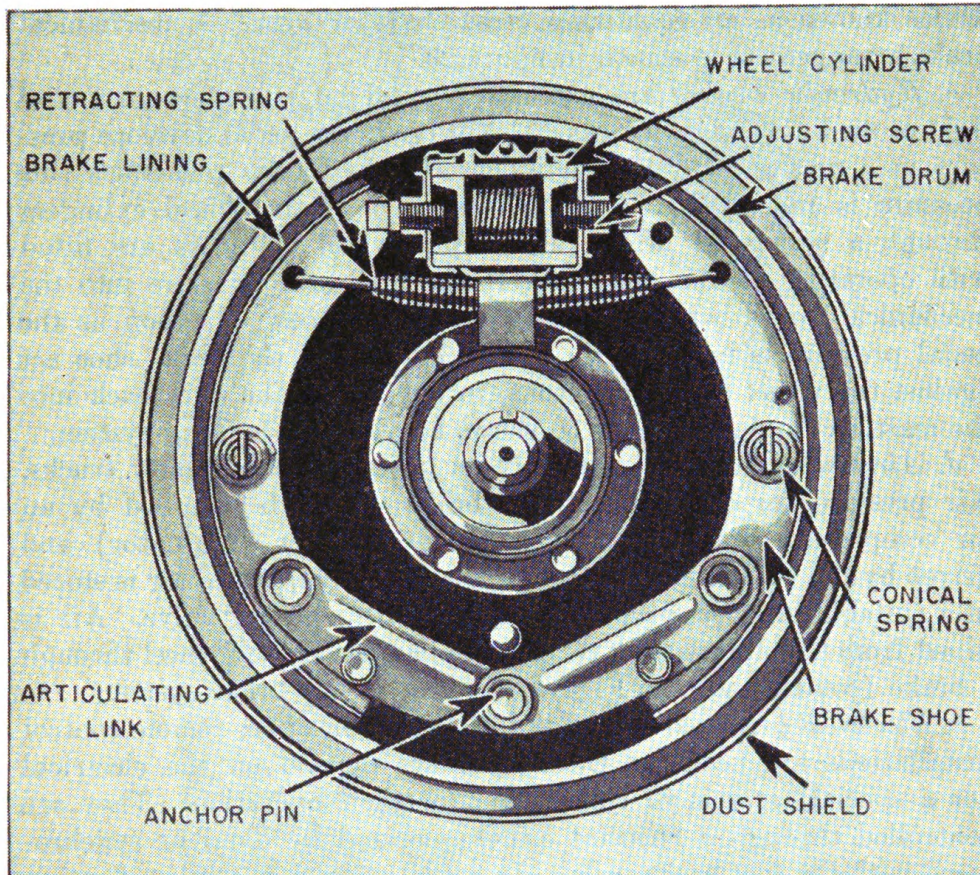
Hydraulic actuated internal expanding brake shoes and related parts shown assembled in place.
